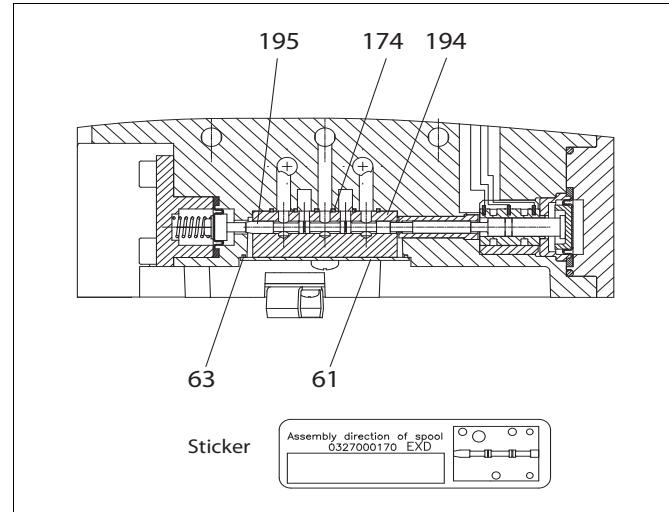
Spool valve assembly, ND9200, ND7200 and ND9300
